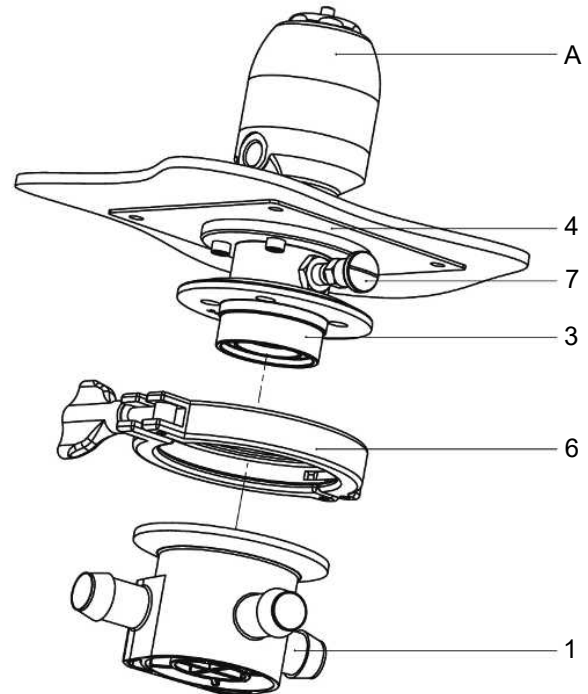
Disassembling the pneumatic stainless steel actuator – housing
